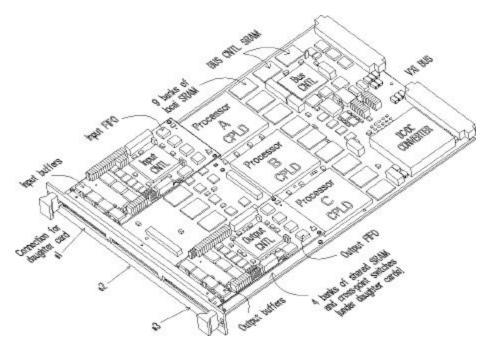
Drawing of the RCA-2 board with an input and an output daughter card attached.
